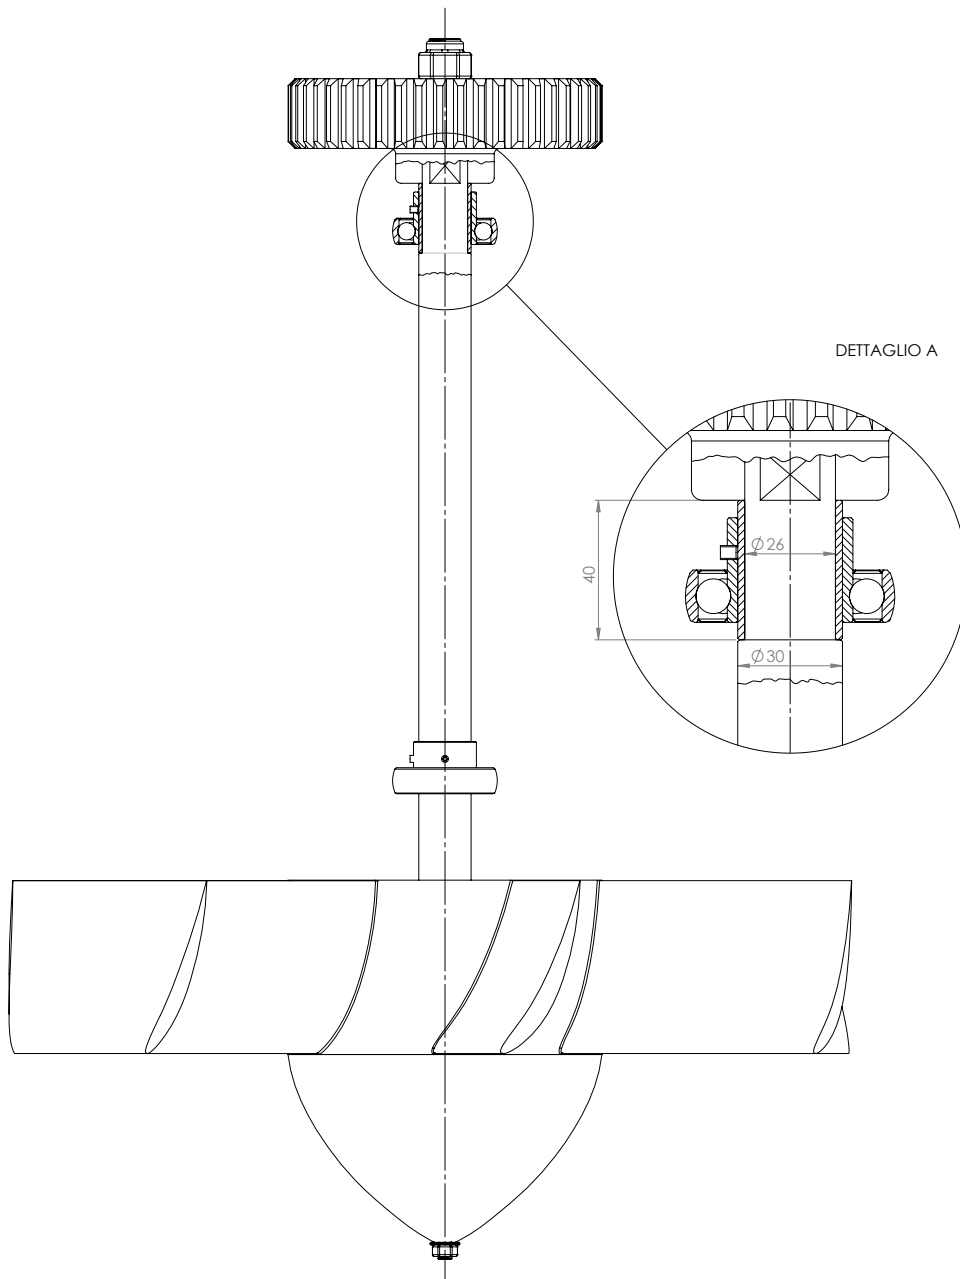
Assembly of the wind tunnel fan group. Detail view of the bushing fitted on the shaft after the machining operation.
